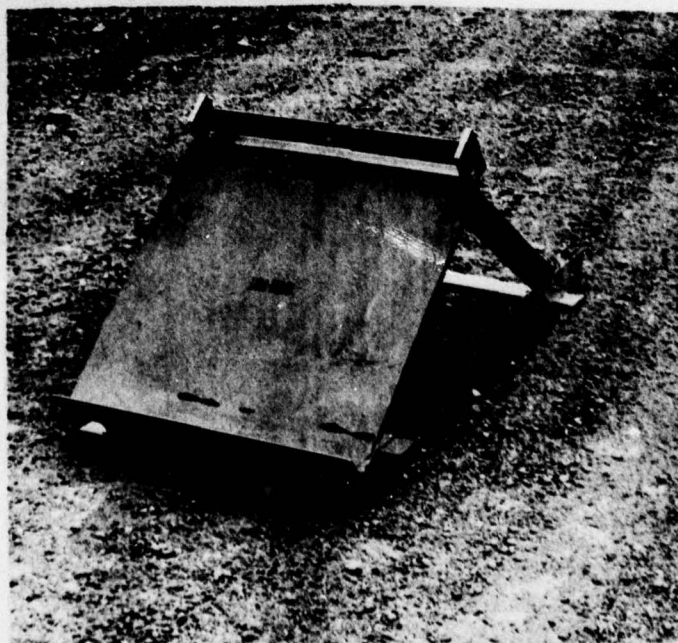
FRONT VIEW OF HOLDING FIXTURE
